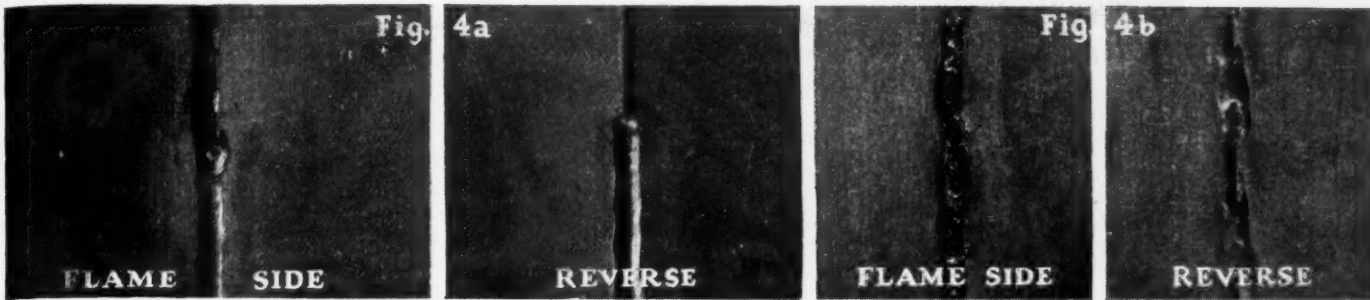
a*—Flange type of weld. Upper portion, flanged and tacked. Lower portion finished. Observe good fillet on both sides. *b*—Similar weld made with poor flux
